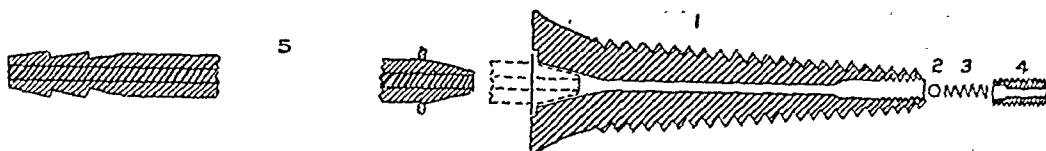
Improved cervical cannula. 1. Cannula. 2. Ball valve. 3. Valve spring. 4. Valve plug. 5. Stem.
